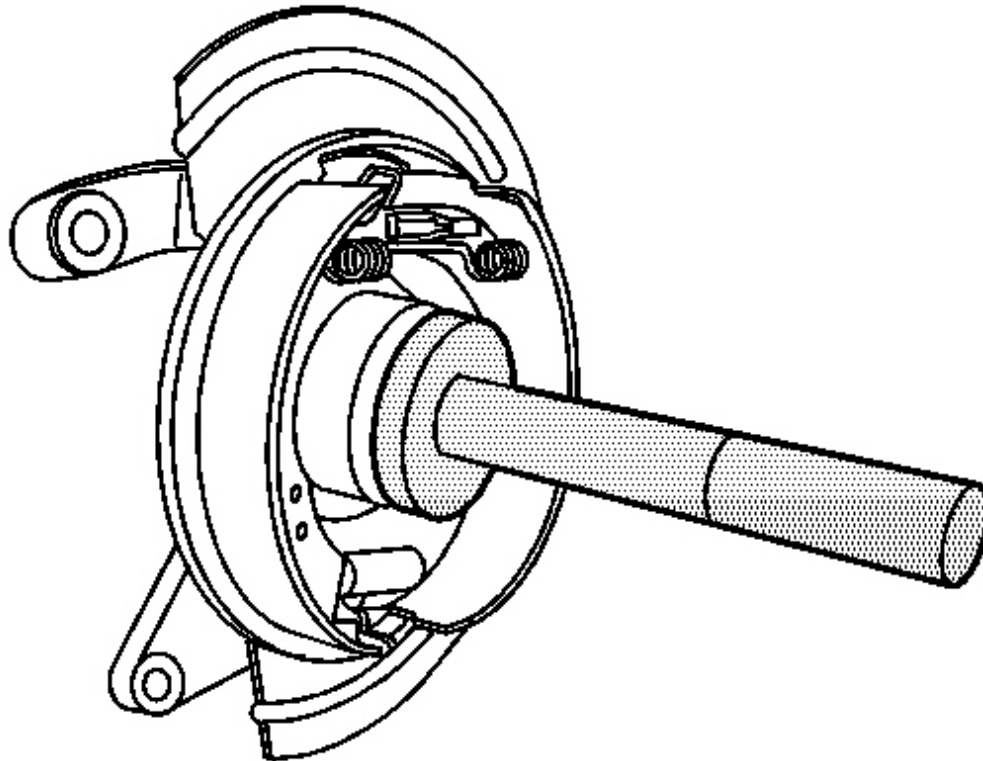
Installing Axle Shaft Bearing Using J 29709 & J 8092
